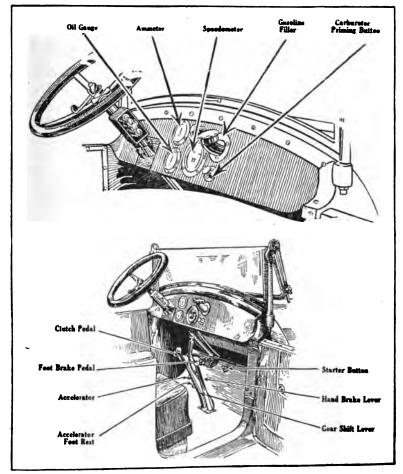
Overland Model 75 Control System and Dash Assembly.
